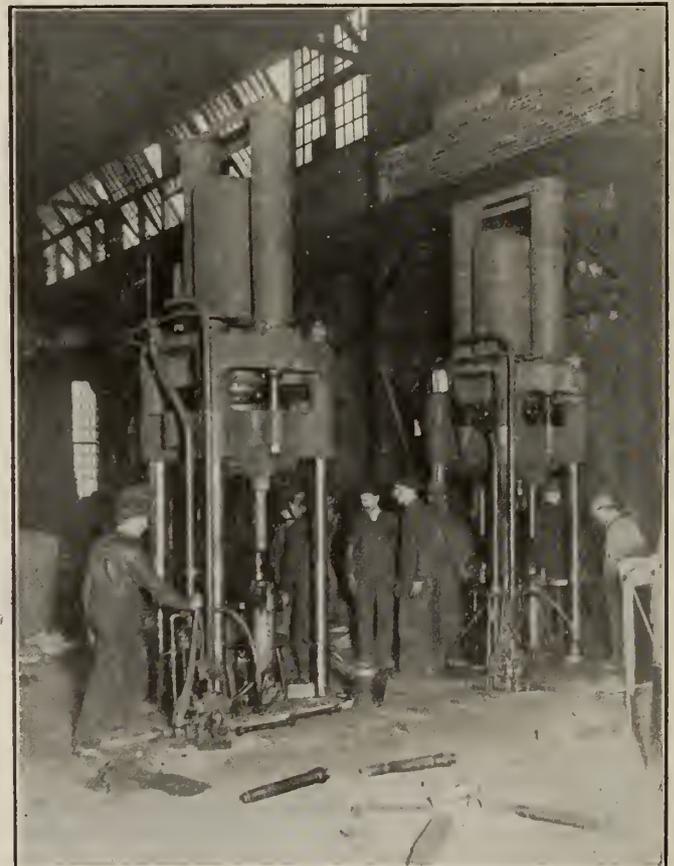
TON R. D. WOOD HYDRAULIC PRESSES PERFORMING SECOND AND FINAL OPERATION ON 18-POUNDER SHELL FORGINGS.
